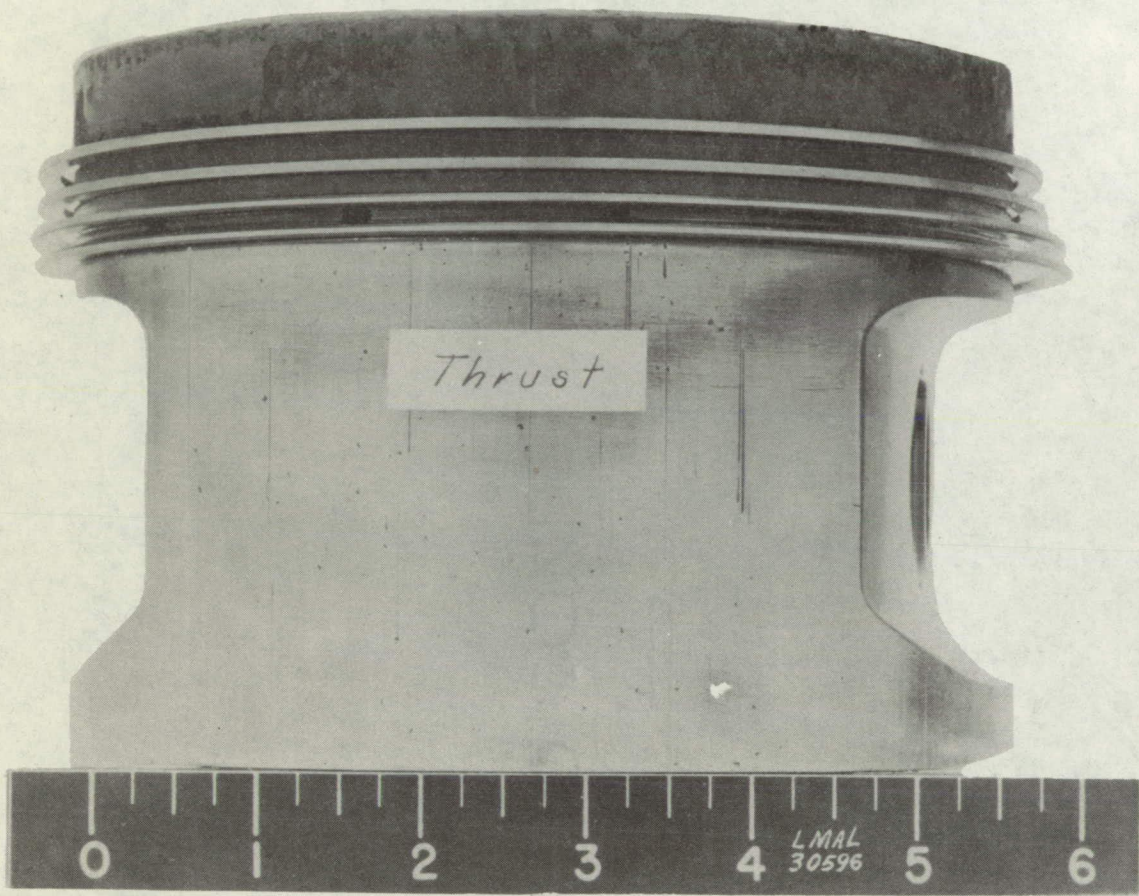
Piston assembly after tests in porous chromium-plated barrels.
